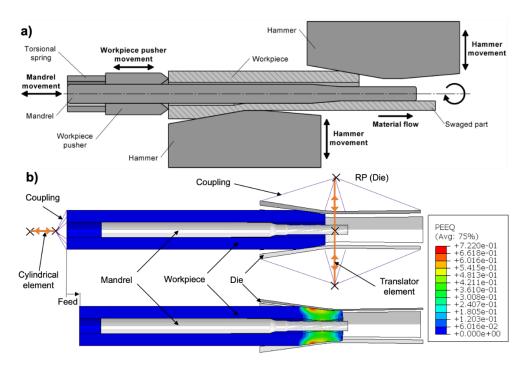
Rotary swaging analysis model. a) Schematic view of forming section and machine elements, upper and lower die show initial and final position respectively. b) Modelling elements and equivalent plastic strains on deformable body (workpiece) for initial and final steps of the simulation.
